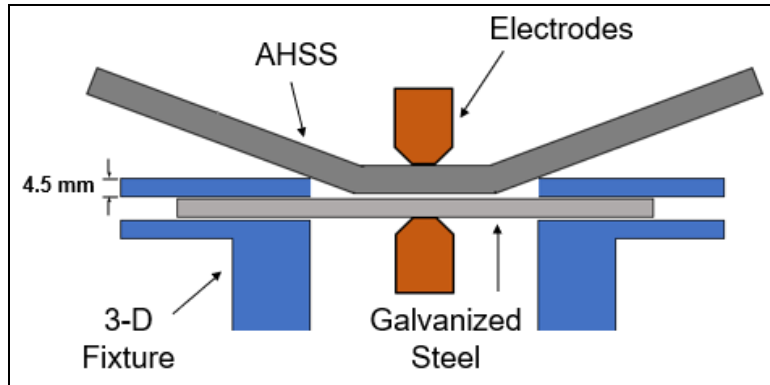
Schematic of weld setup utilized during Weld Set #4
